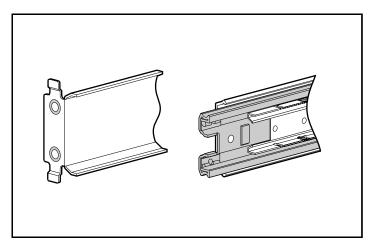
Identifying the front of the Slide Rail and the Mounting Bracket.
